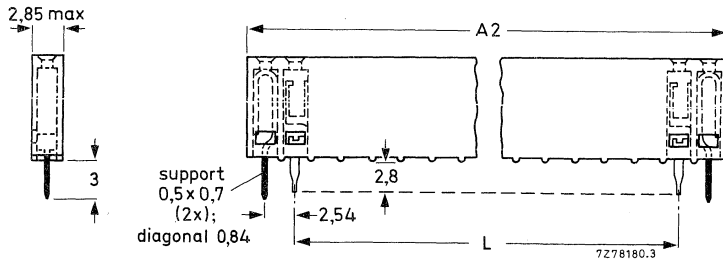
Panel socket, single row. Dimensions are identical with those in Fig. 5 except as shown. See Table 2 for dimensions A2 and L.
